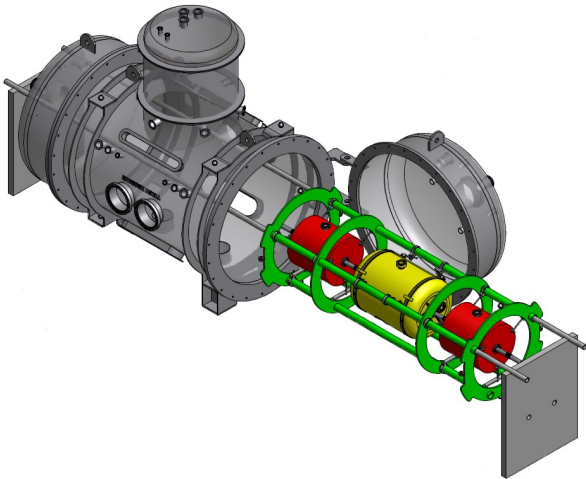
The actual layout of the demonstrator is shown. A base frame carries the cavity embedded by two sole-noids. For assembling the cryostat an auxiliary construc-tion is needed.
